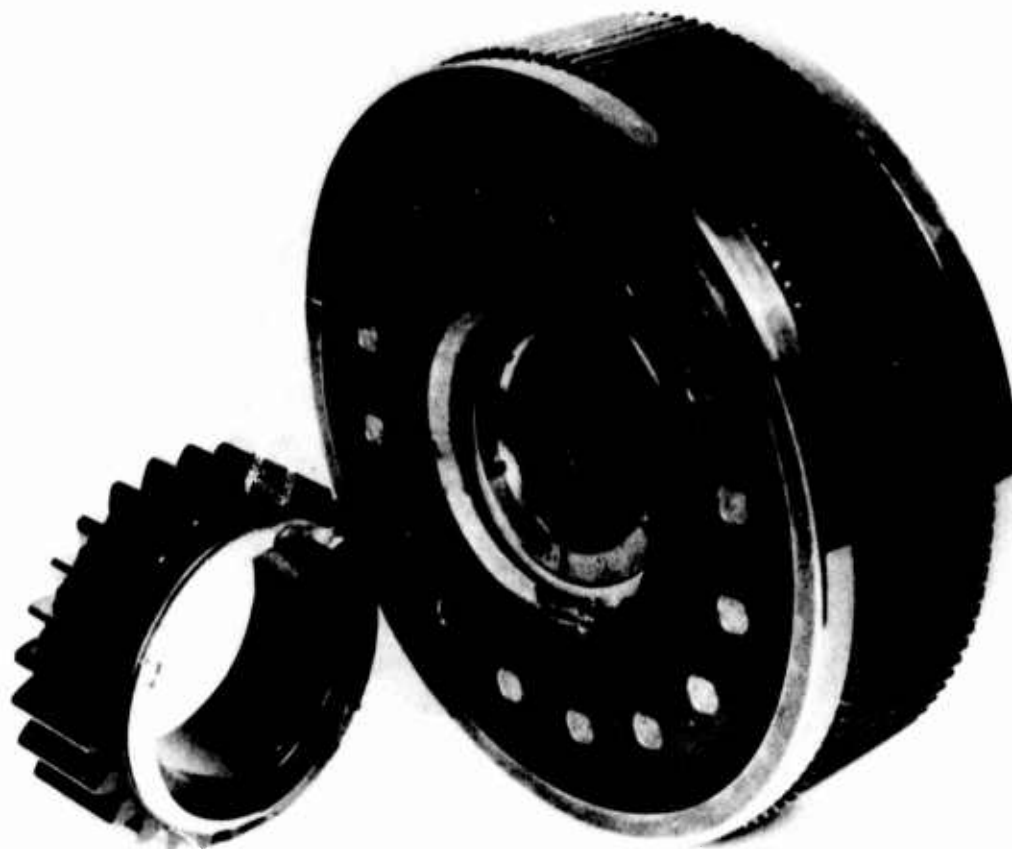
Gear Separation - Second-Row Pinion Dummy Gearbox.
